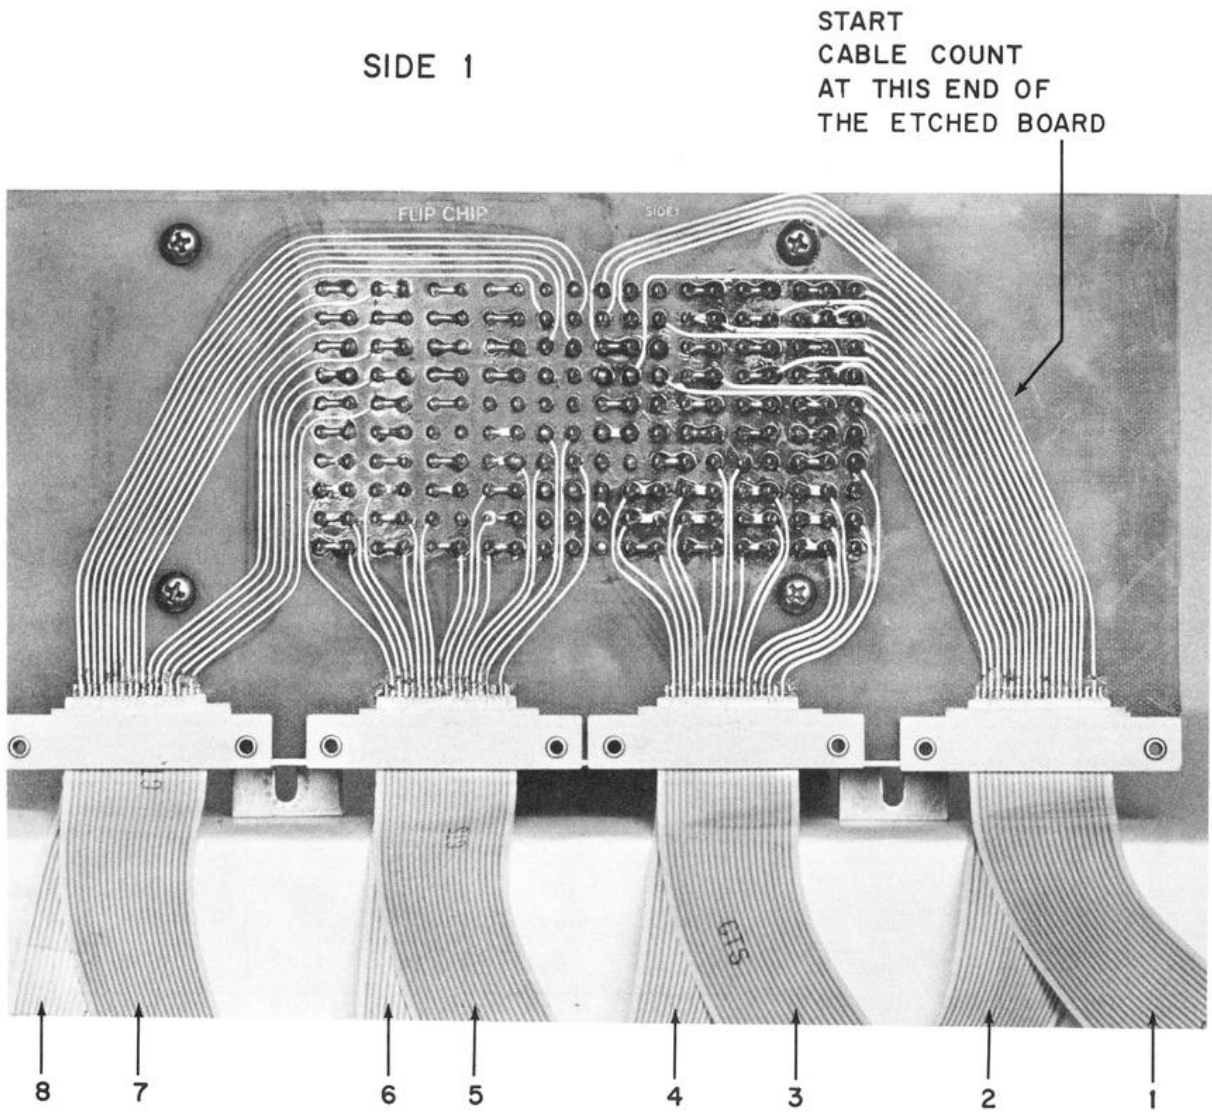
Patchboard Connector Cables – Module Rack Location
